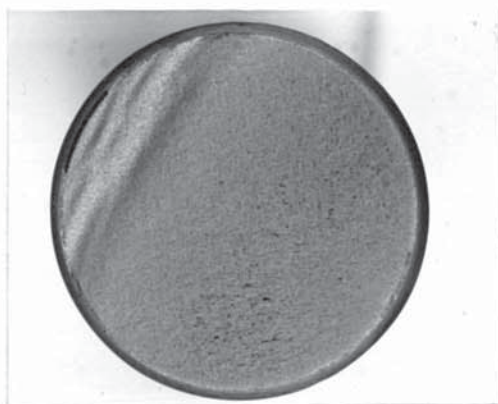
(b) 550°Cx16hours - M2 Fatigue Fracture Surface
